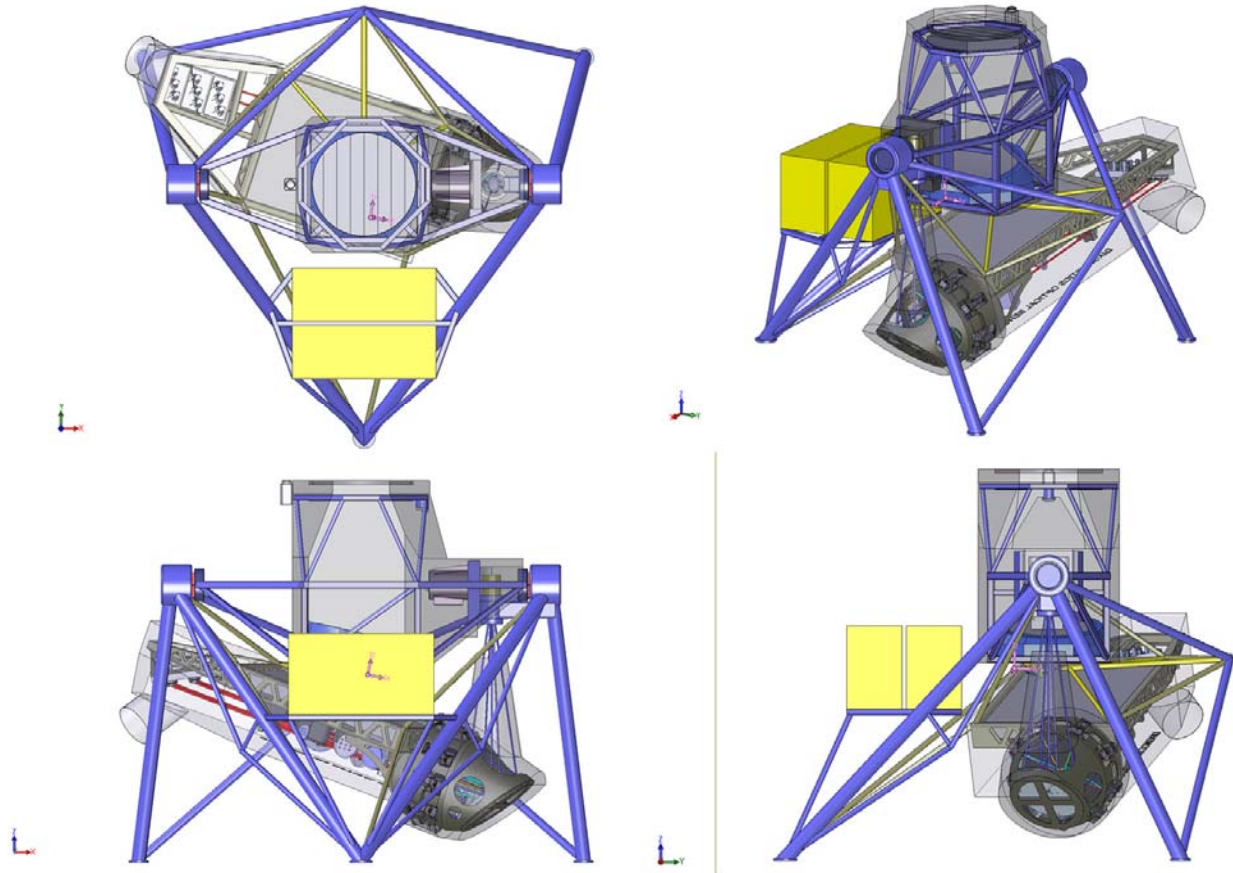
Isometric views of the complete LGSF Top End Assembly with all components installed. The yellow boxes are the LGSF electronics cabinets.
